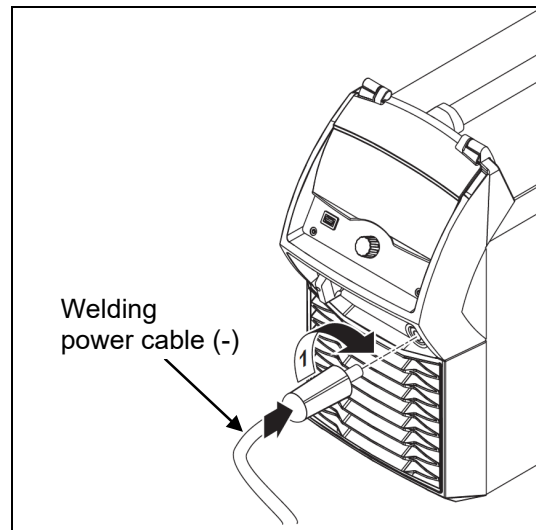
(b) Replacing the welding power supply (2/2)
